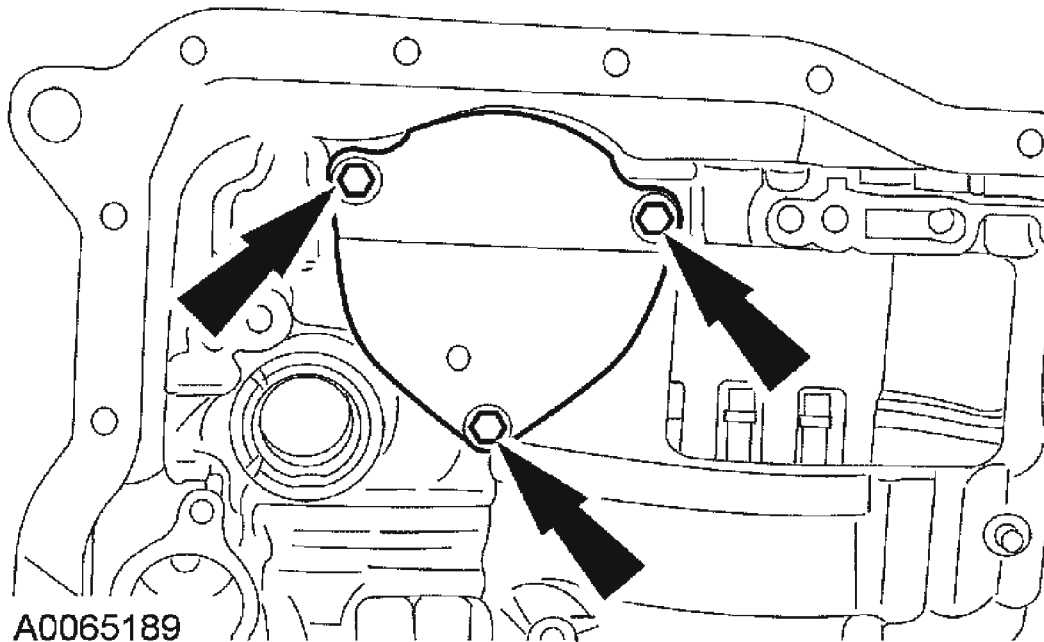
Removing Three Intermediate/Overdrive Piston Servo Cover Bolts And Servo Cover
